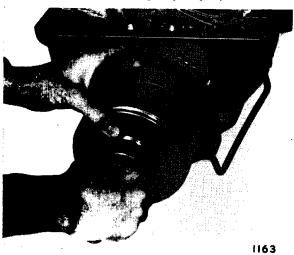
Installing front clutch, rear clutch and forward sun gear.
